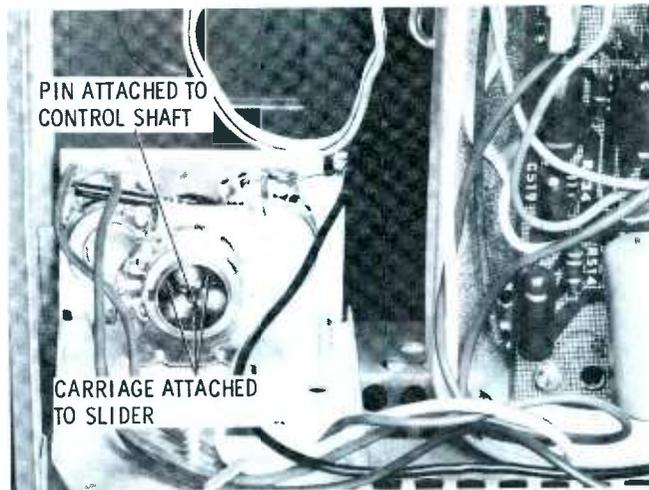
Ball bearings serve to "gear down" horizontal hold control in order to permit more precise adjustment.
